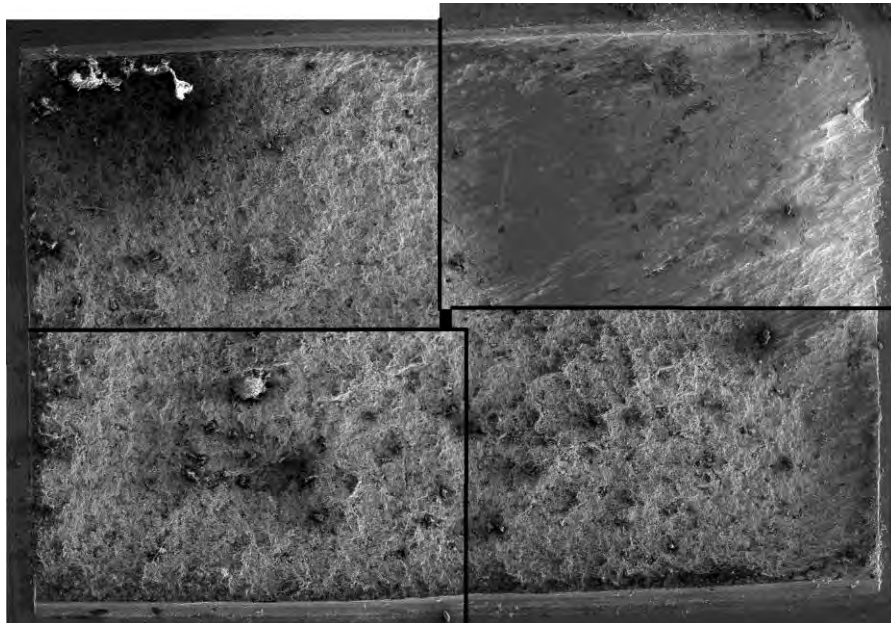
Composite SEM micrograph of incident valve stem fracture surface.
